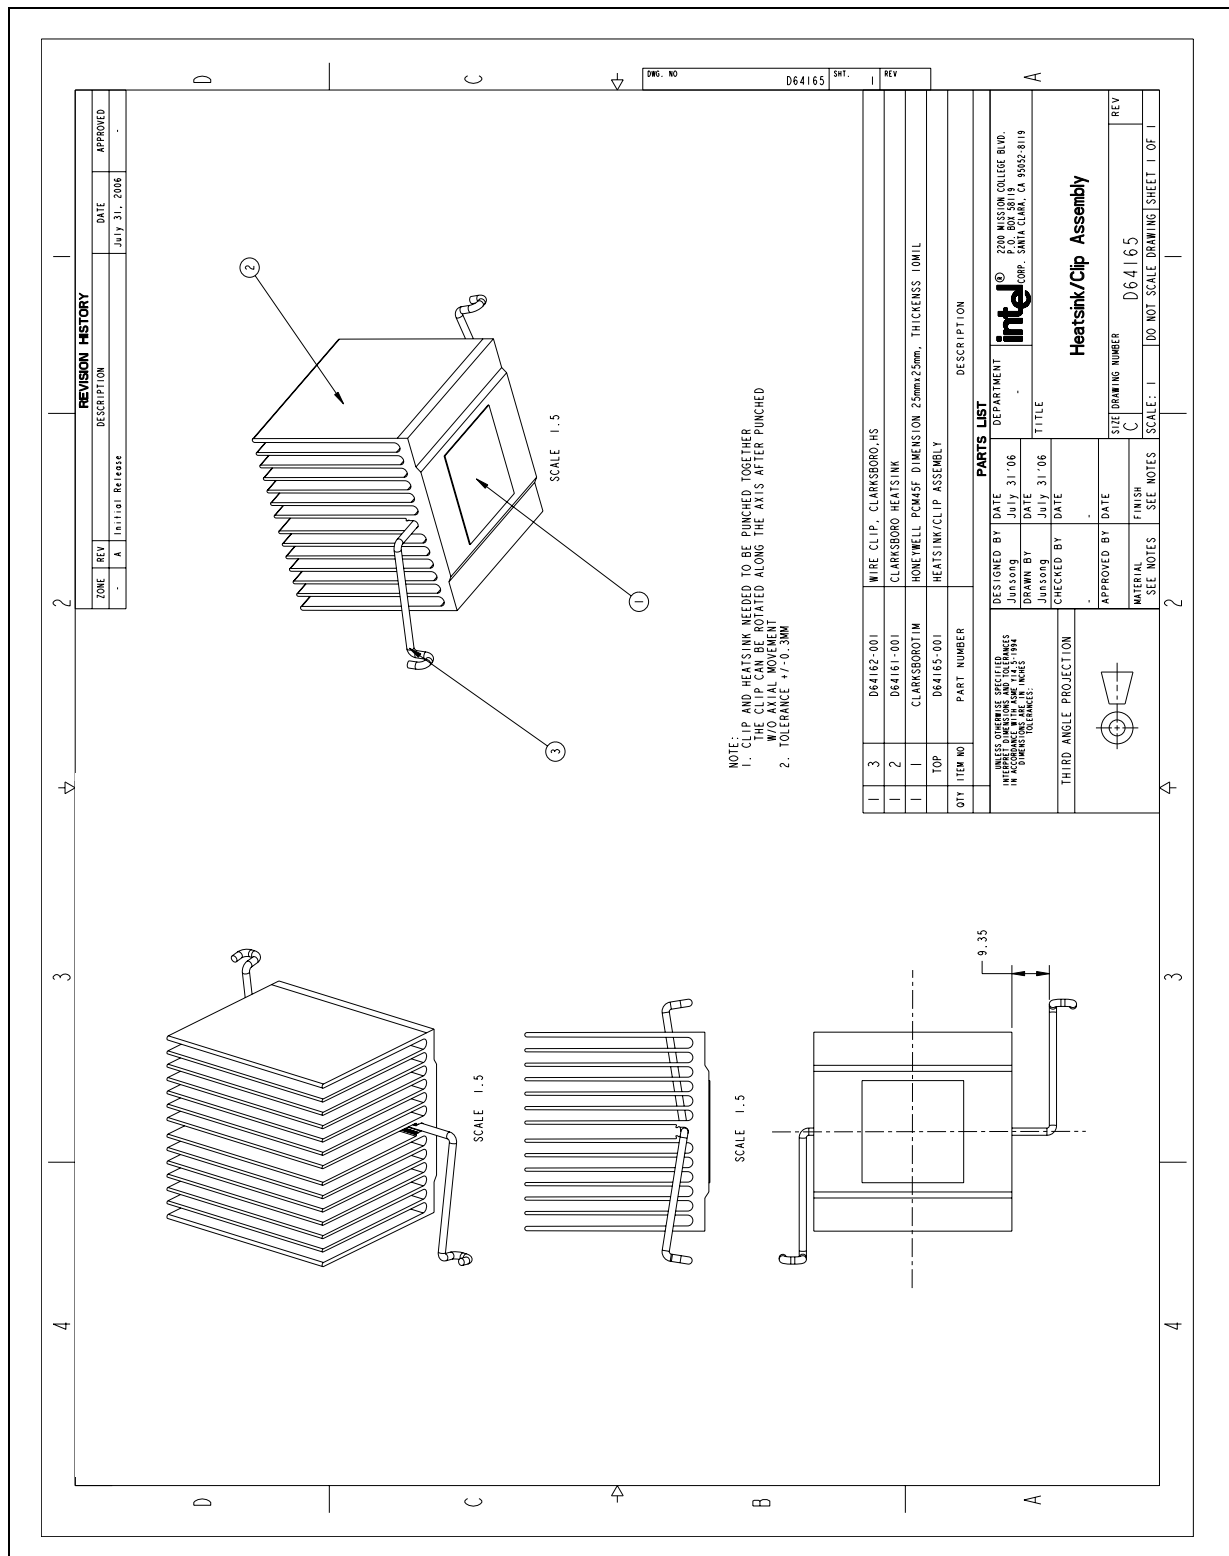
Intel 7300 Chipset MCH Heatsink Drawing (2 of 3)
